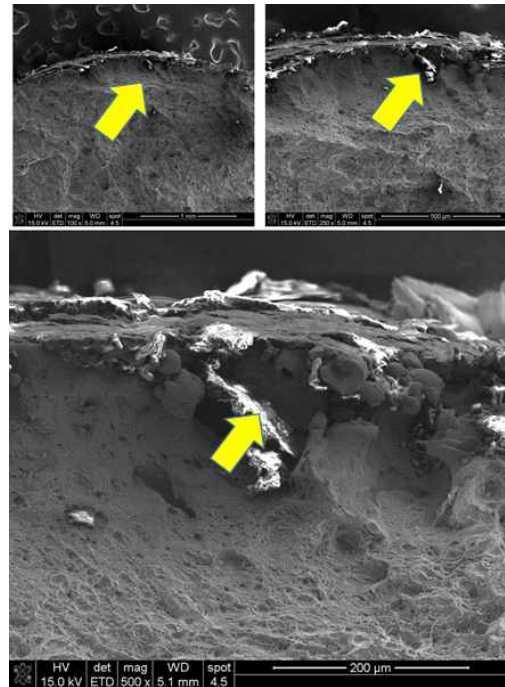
Fatigue fracture of specimen with original rough surface(ZO); The arrow indicates the crack start point
